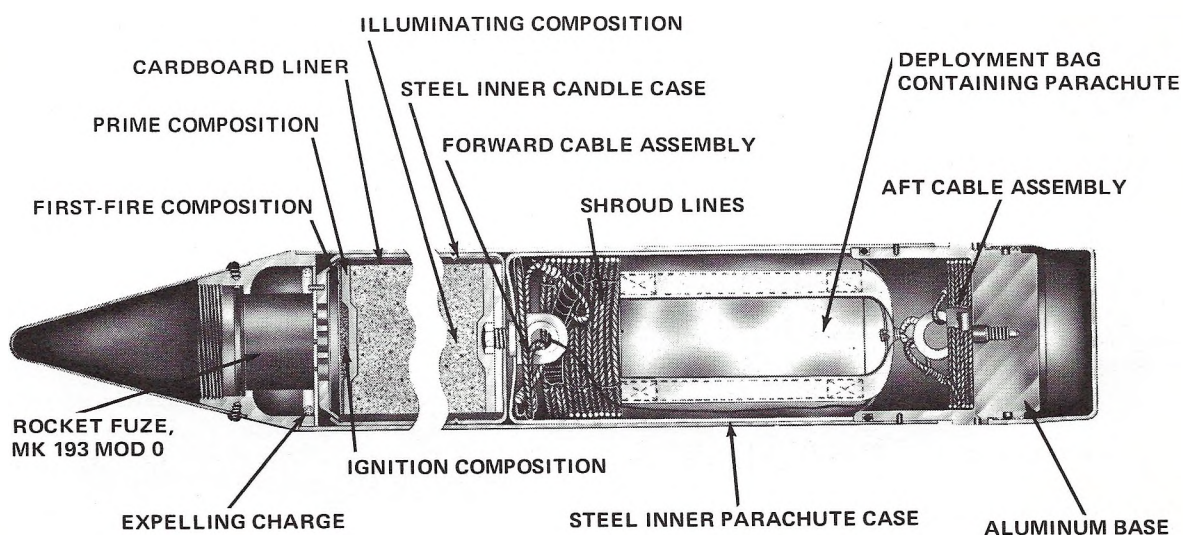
Mk 33 Mod 1 Flare Warhead Configuration
